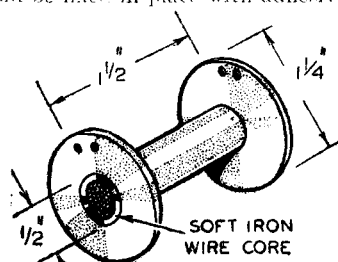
Core and winding spool for a small tone control, iron-core choke.
